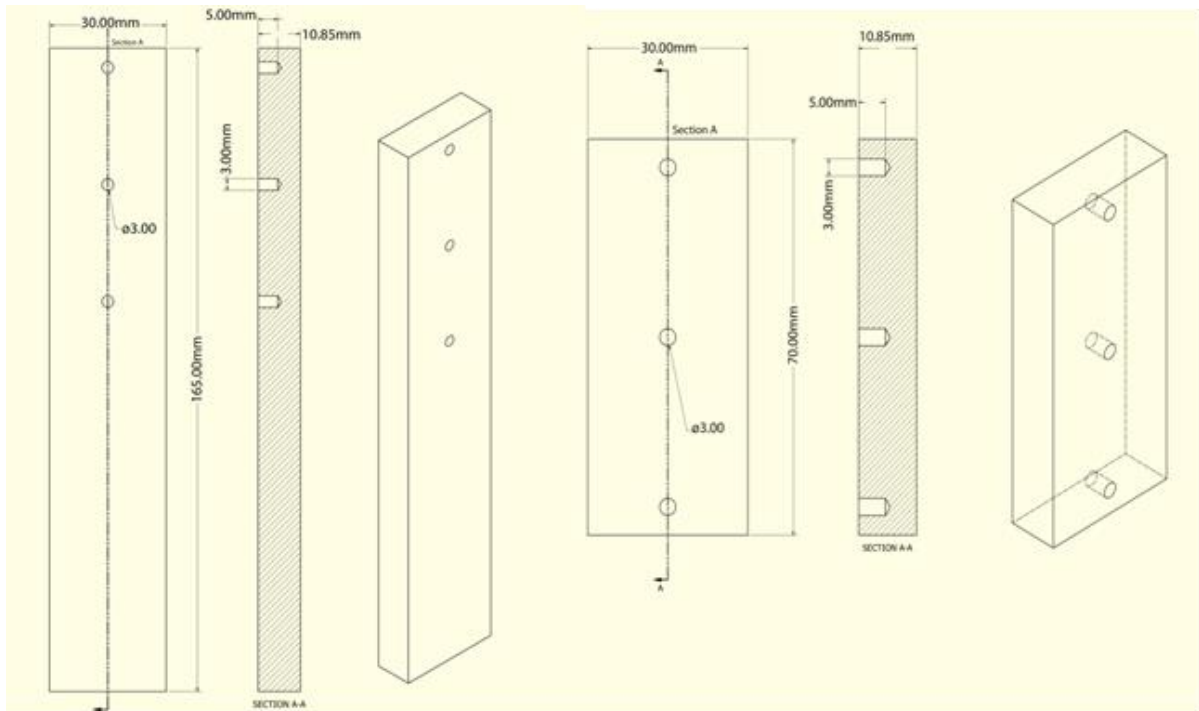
Final Base Plate Calibration Cage Design: Calibration Rods
